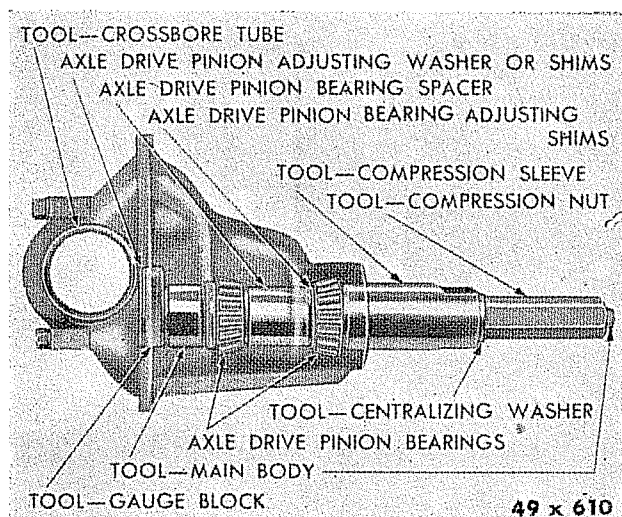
Main Body, Bearings, Spacer and Shims Installed.
